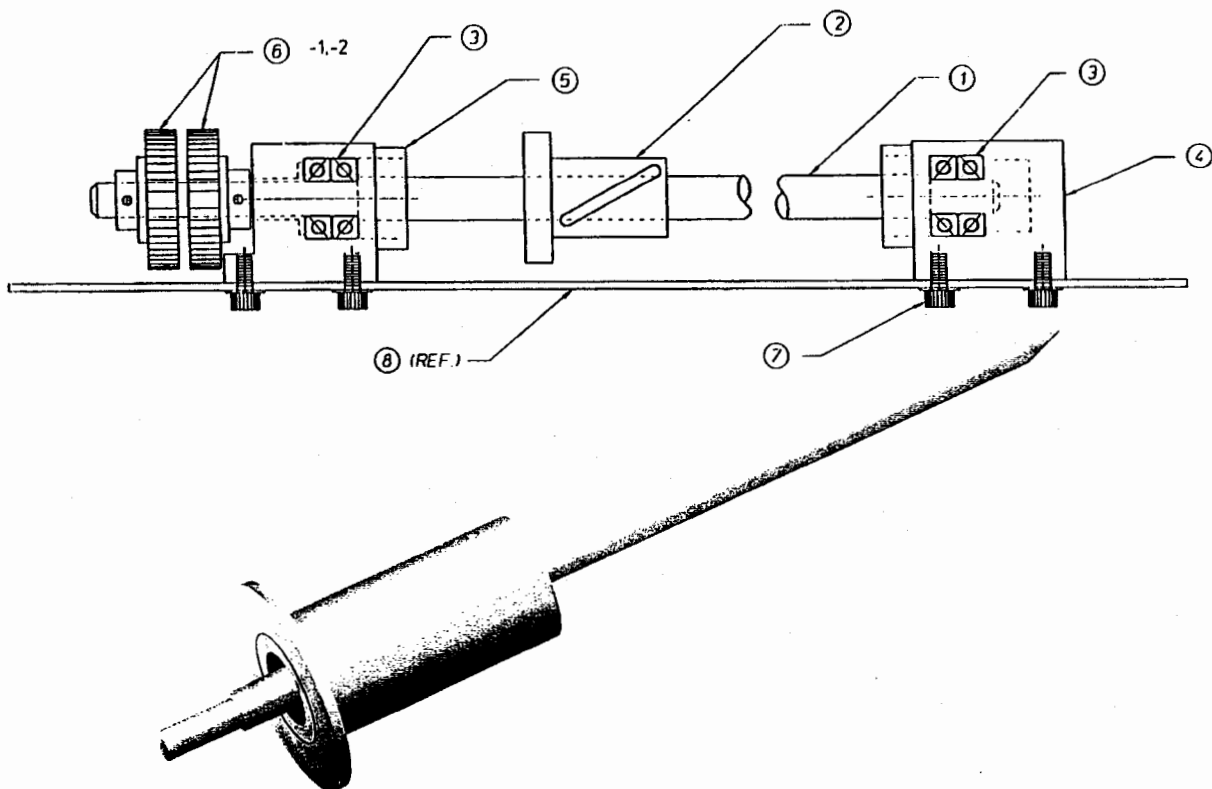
Mechanical Percussive Penetrator Built by UCSD Mechanical Engineering Project Class to Validate Results Shown in Figure 16. (a) Precision driving assembly, and (b) Penetrator.
